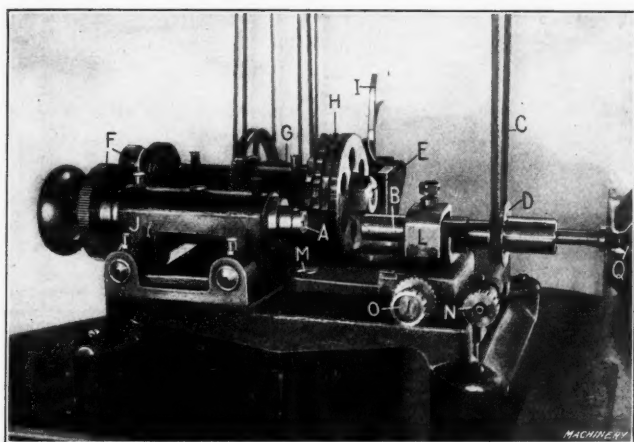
Machine used in Damaskeening Winding Wheels, etc.
